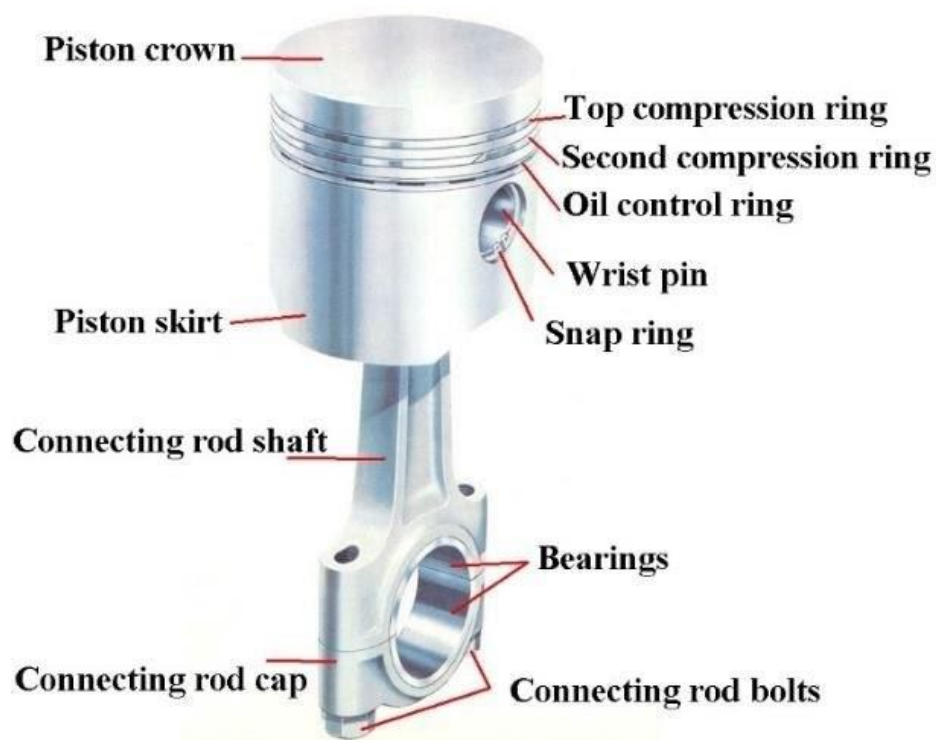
Isometric view of a classic petrol engine's piston [4]
